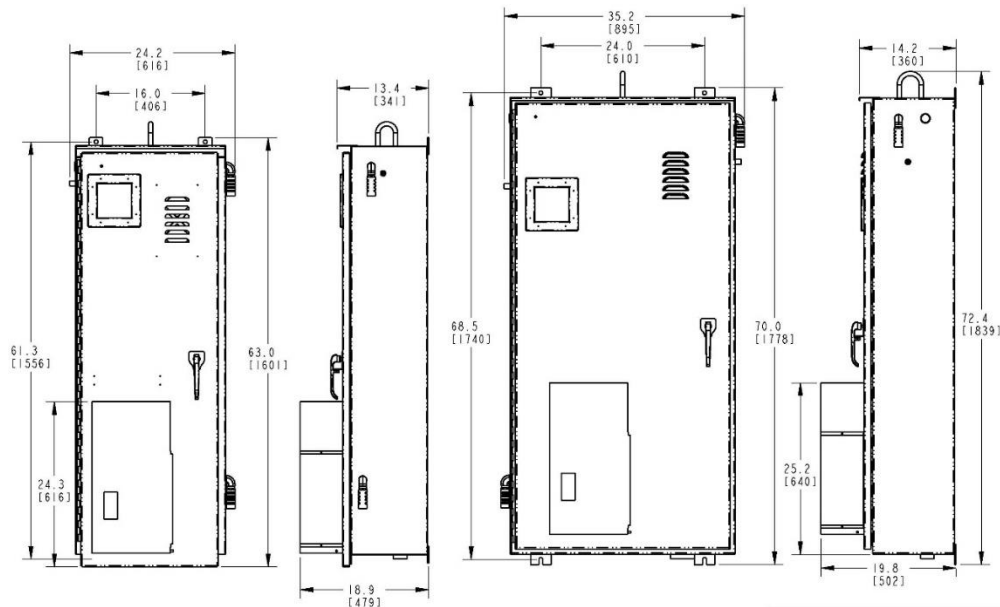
Generator Mounting Dimensions: Standard Generator (left) and Generator with Bottle Back-Up (right)
